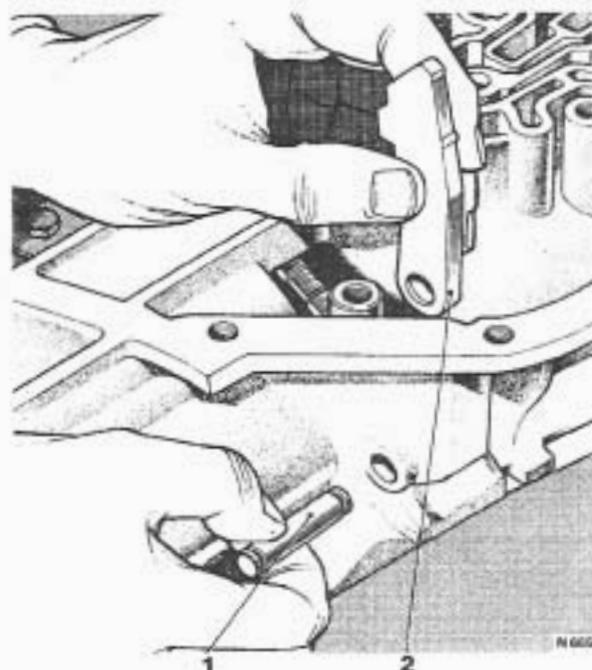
FITTING THE PARKING PAWL AND SHAFT
